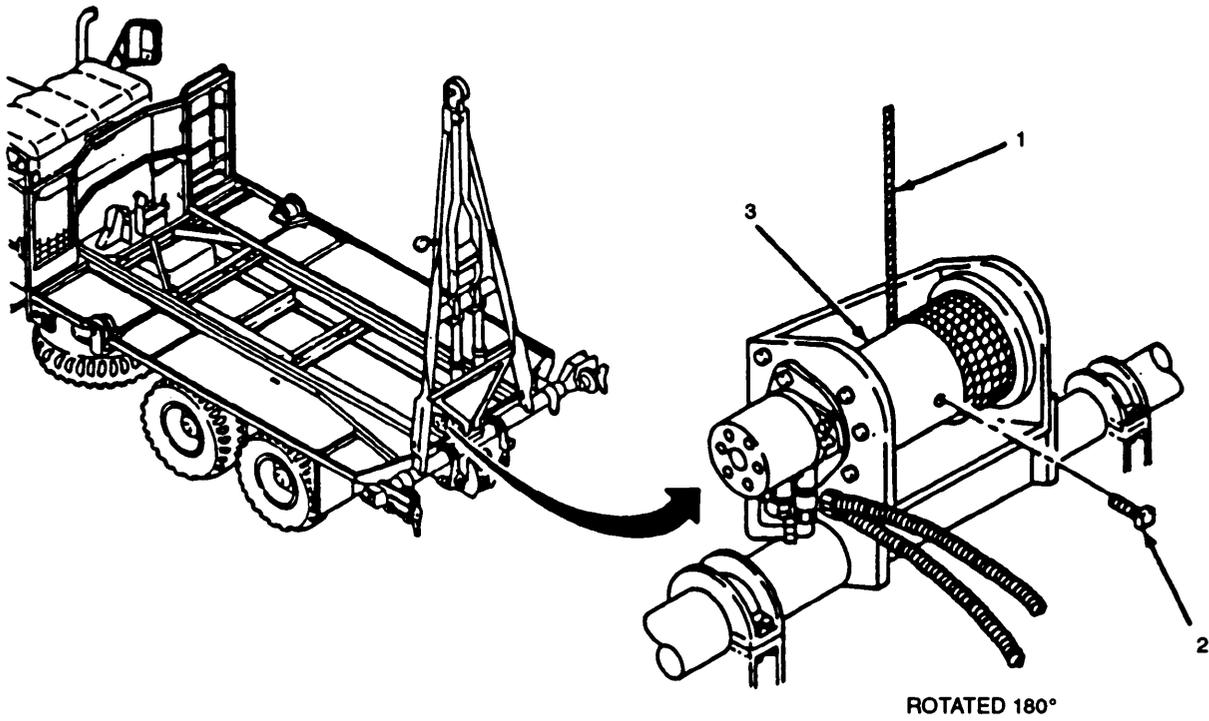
Rear Winch Assembly and Motor PG 115-043R.
